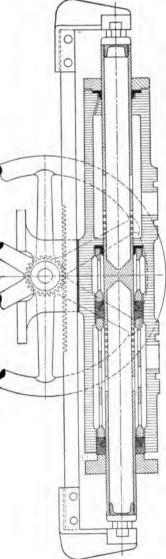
Section Showing Pilot-Wheel Operation of Control Valve for High Pressure Courtesy of Kaestner and Hecht Company, Chicago
